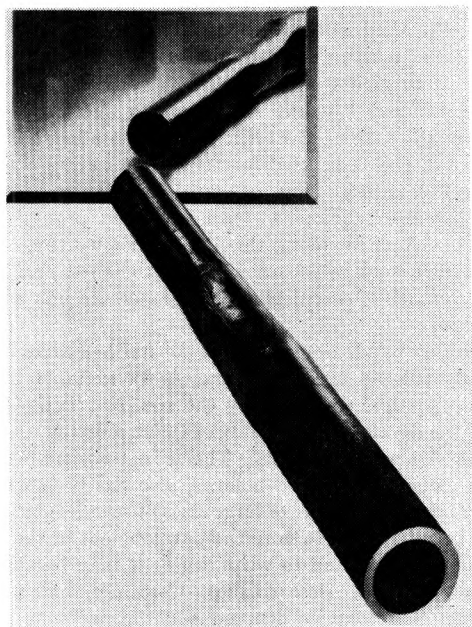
TUBE PARTIALLY ROLLED FROM ECCENTRIC BLANK
